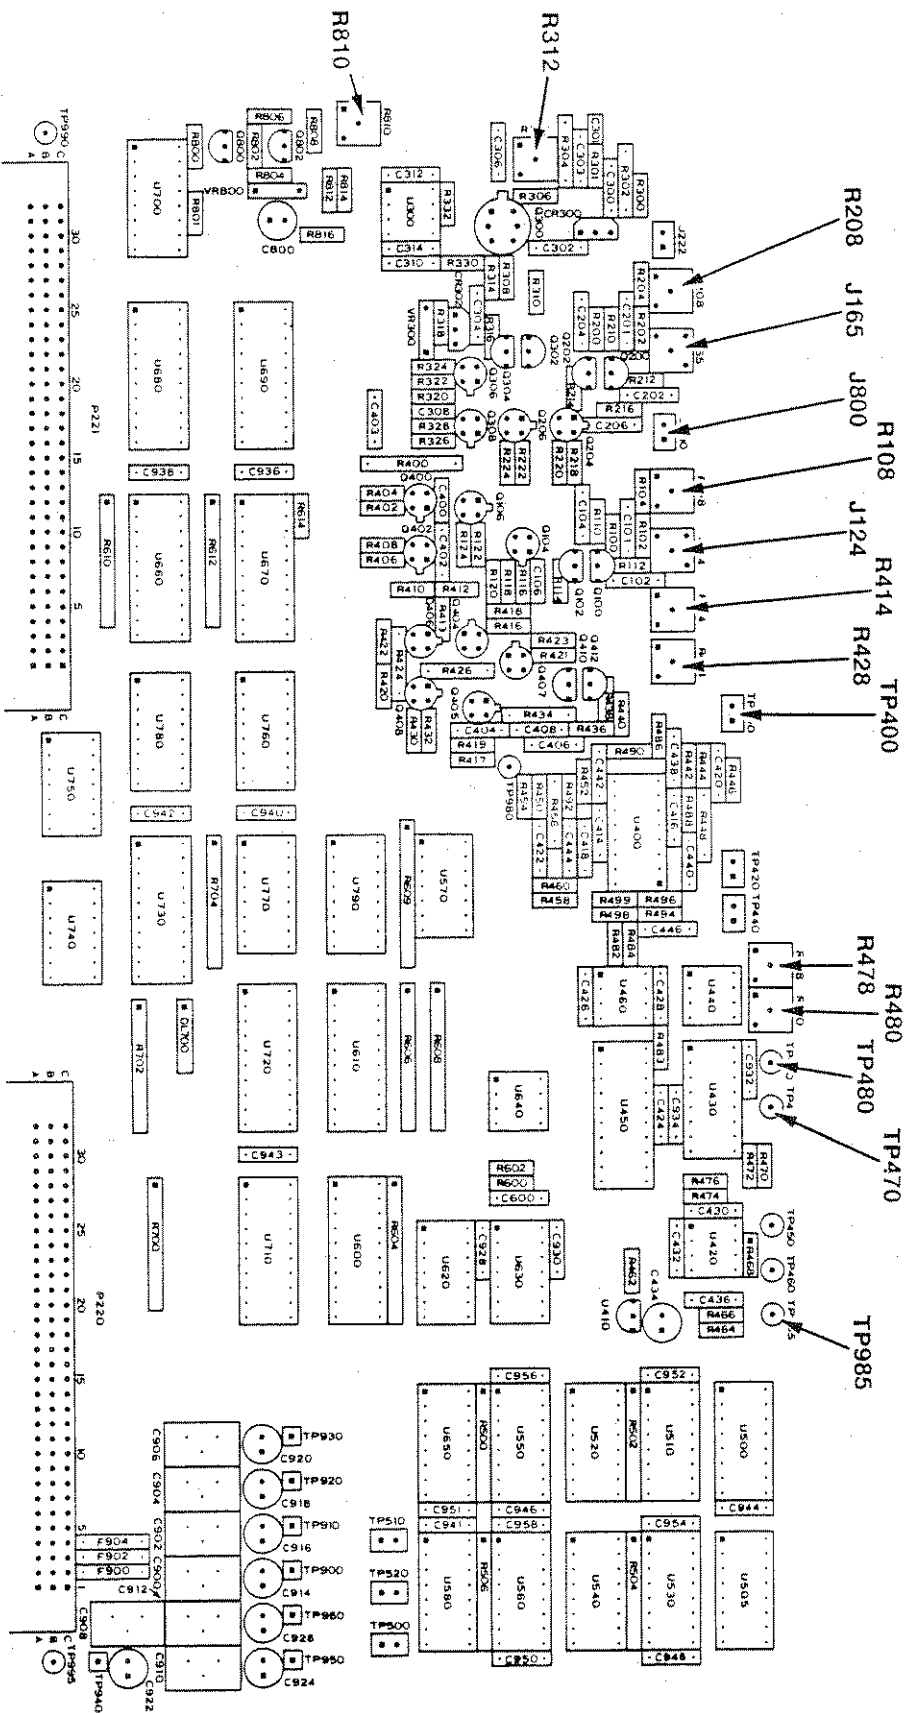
A22 - Trigger Board Adjustment Locations
